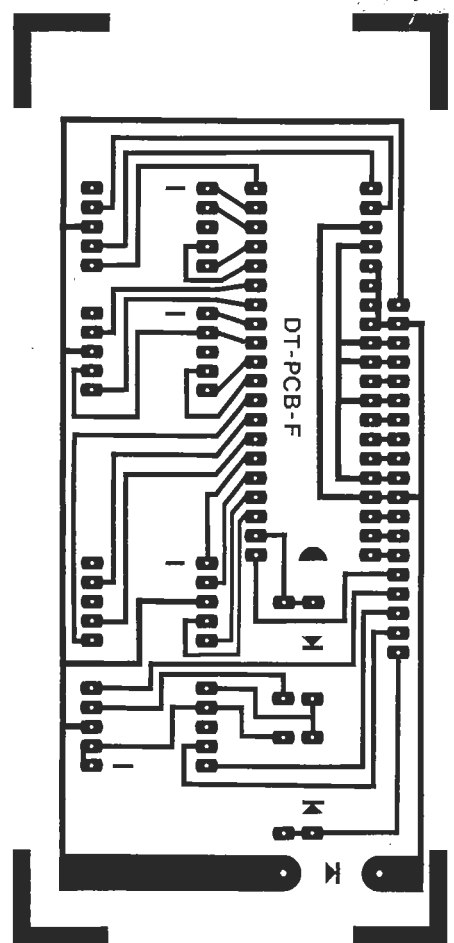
FULL-SIZE FOIL PATTERN for the front board. This board holds the clock IC and 7-segment displays.
